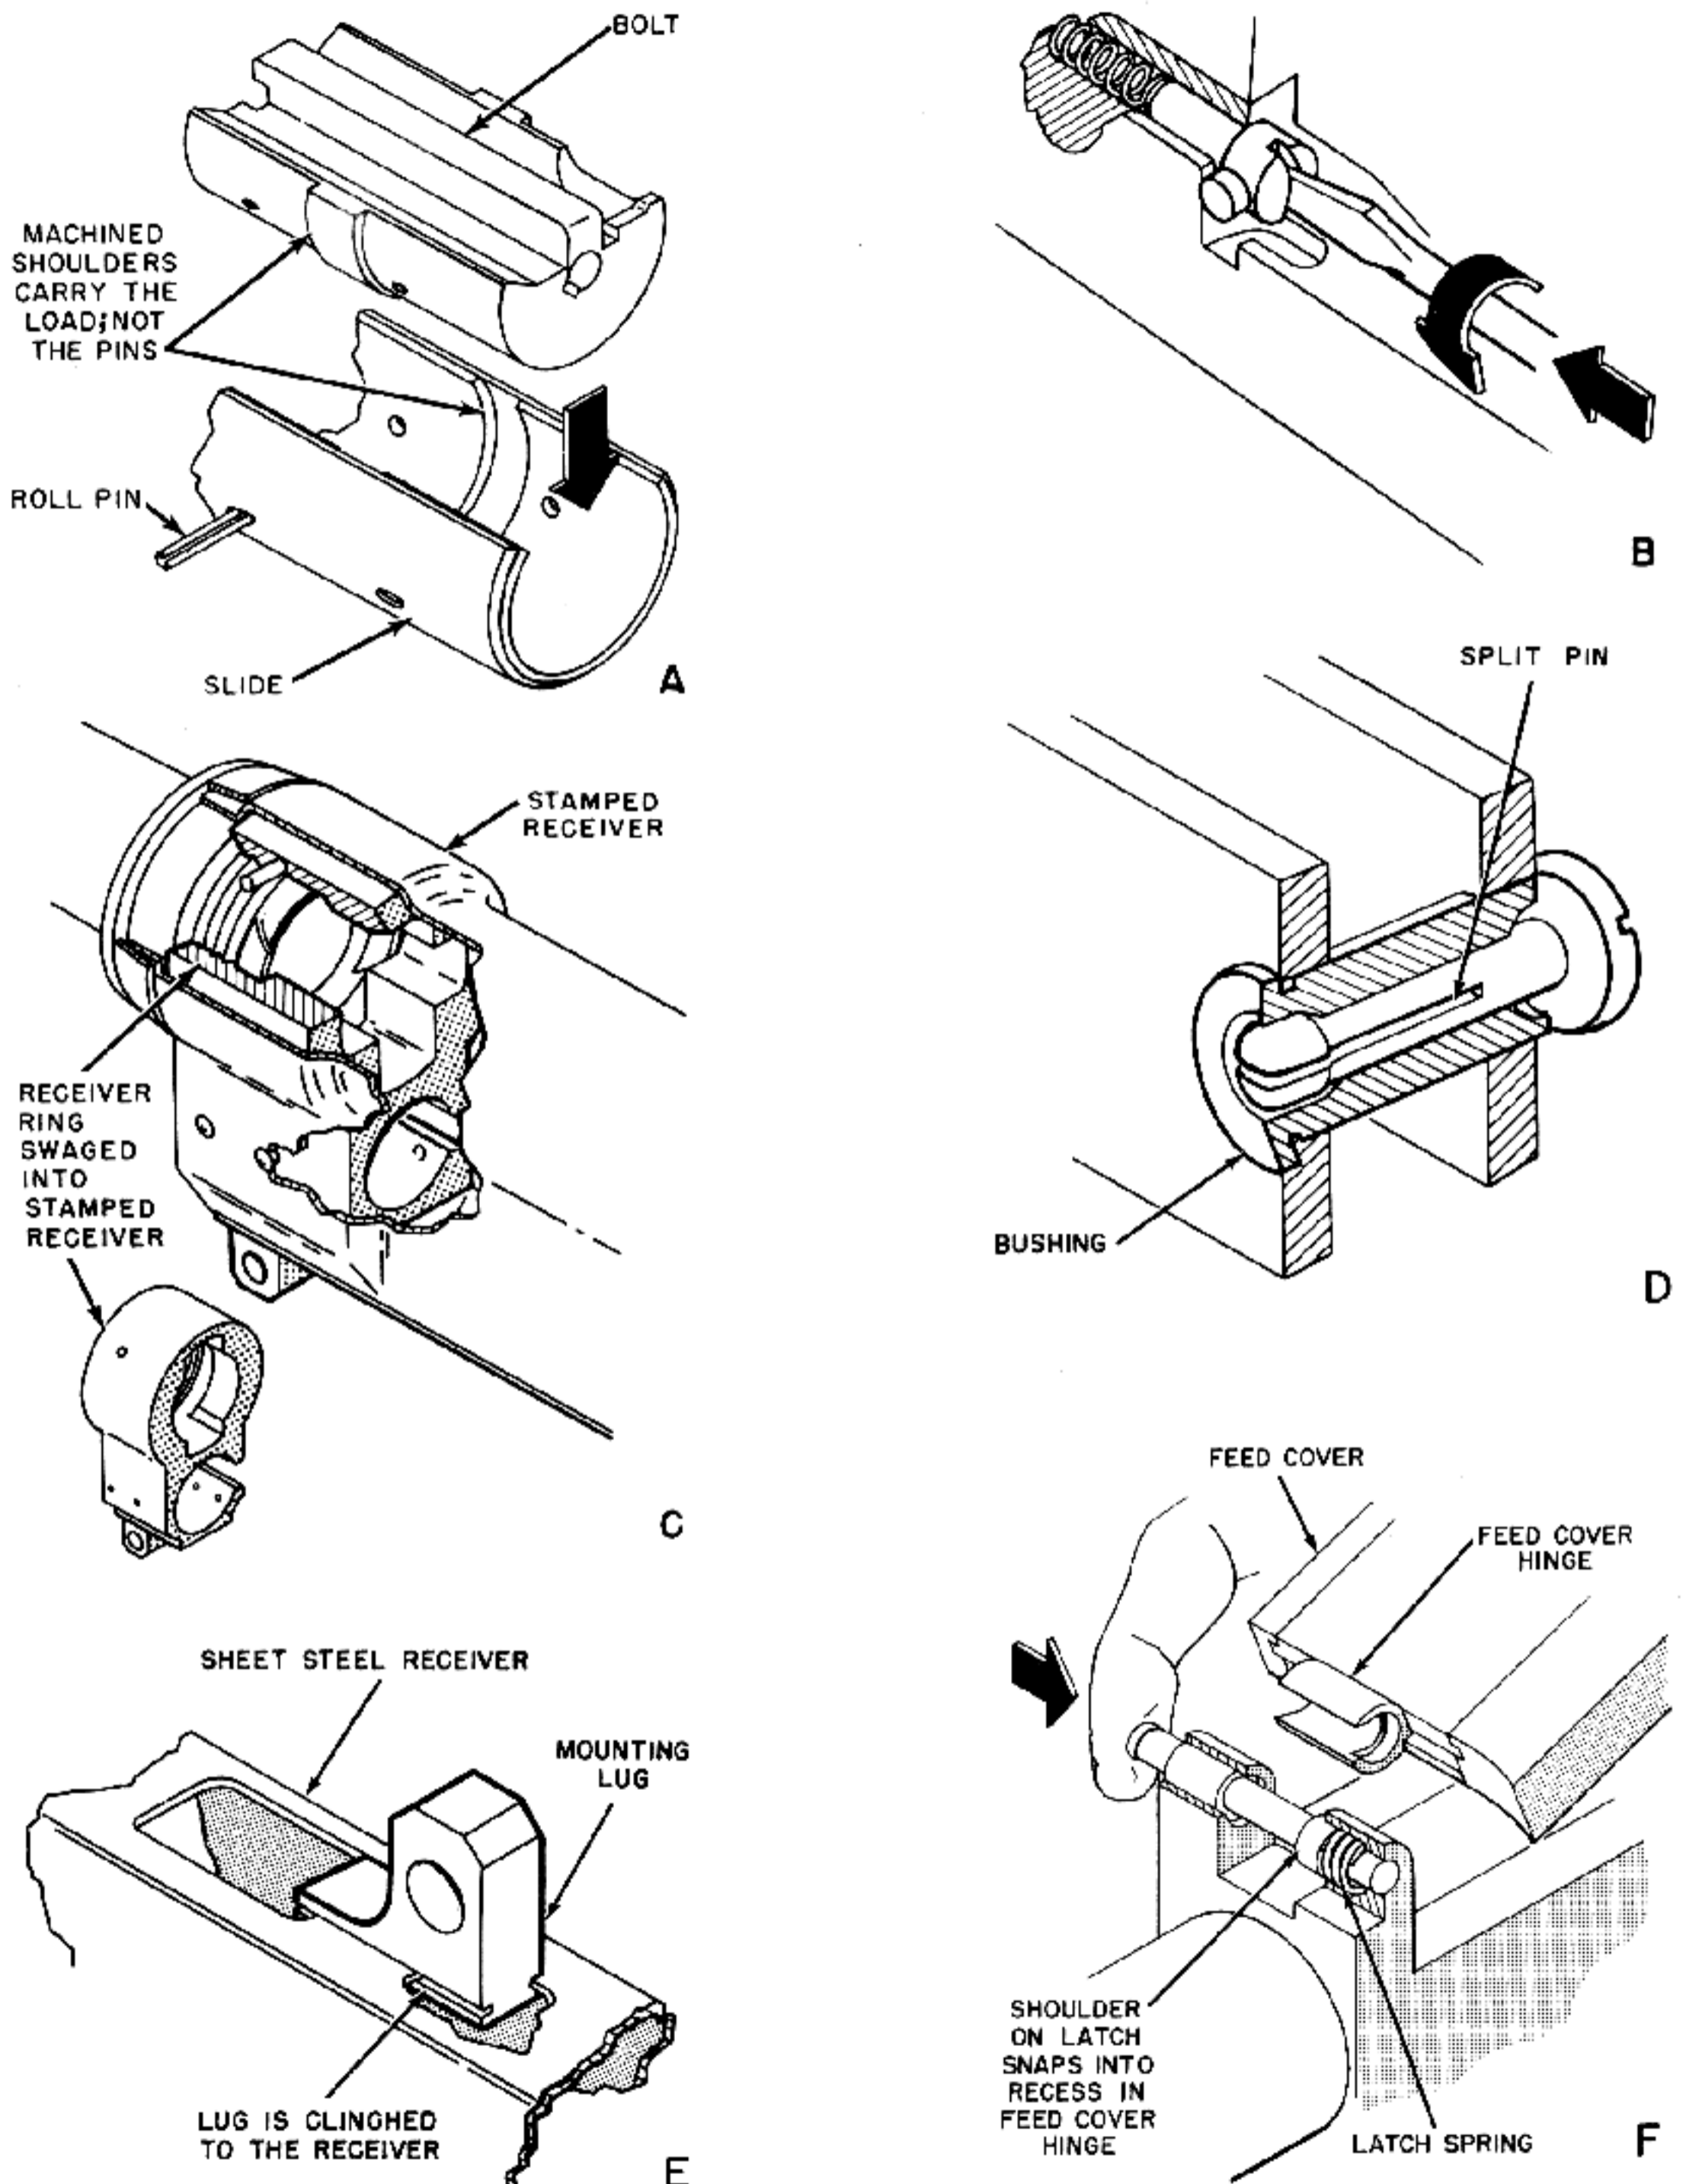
Methods of Attaching Machined Parts to Sheet Metal Receivers.
